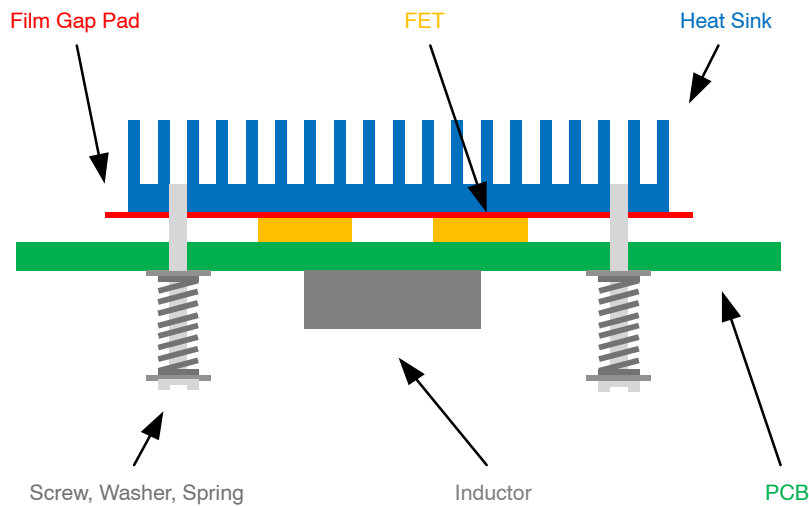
shows the setup with the heat sink mounted to the PCB. Inductor and MOSFETs are placed on the bottom side – the heat dissipates through the PCB to the heat sink. Numerous vias are placed around the hot spots of the PCB to reduce the thermal resistance of the PCB and improve the vertical heat flow in the PCB. The film gap pad between the heat sink and PCB levels out any roughness and unevenness to minimize the thermal resistance. The heat sink has threads for the screws that keep the heat sink and springs in place. The springs are gently pre-stressed by the screws that cause the heat sink to press onto the PCB. The length of the compressed spring is proportional to its force and all four springs need to have the same length to achieve the same pressure for each fixation. Using the same spring length and mechanical force for each setup ensures replicable and comparable results.
